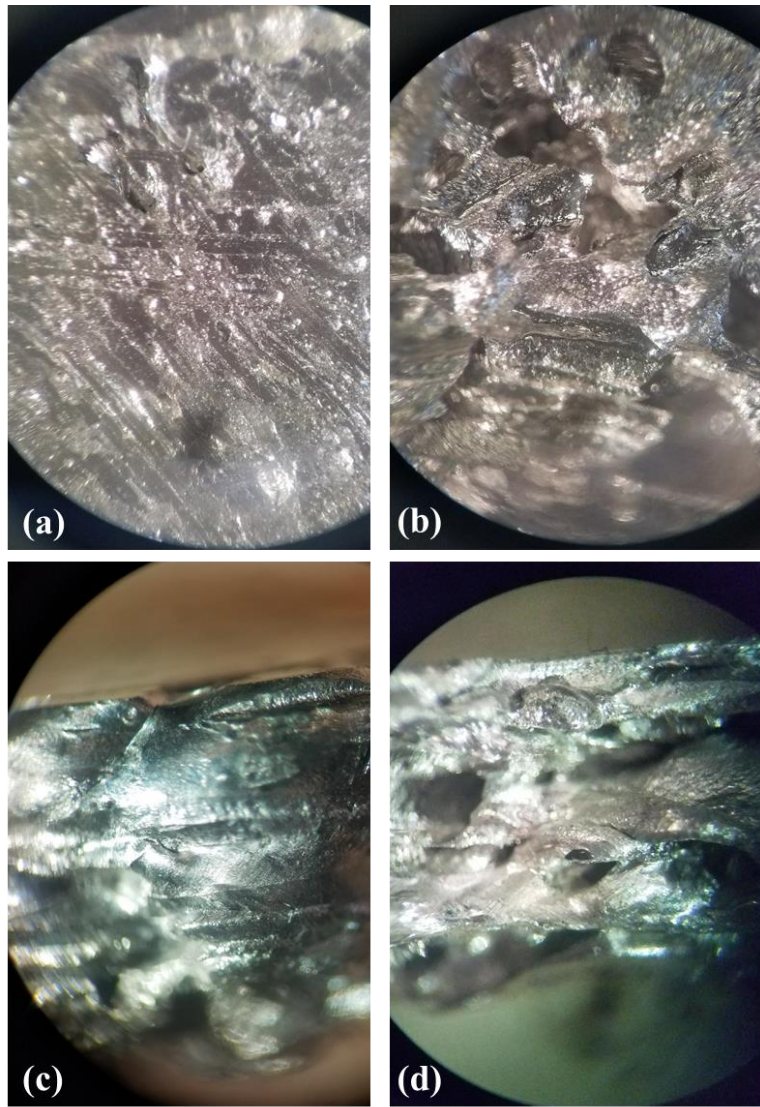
(a) Bottom surface (b) Top surface (c) Side profile (d) Rear end
